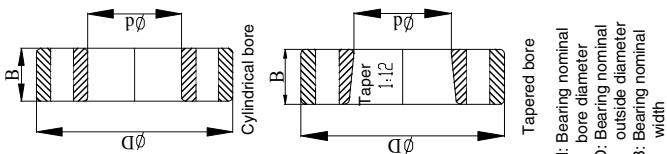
Illustration of radial bearings(Taper roller bearings excluded)
